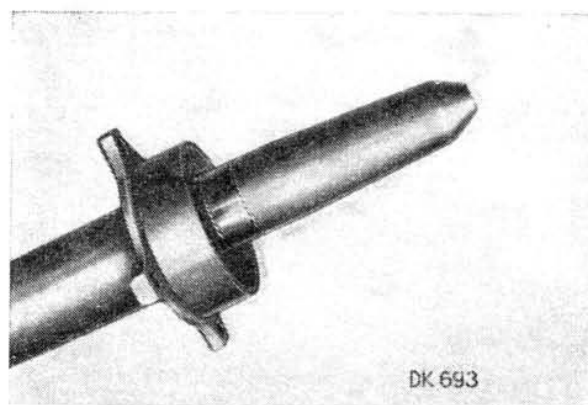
/3 - Installing Half-axle Shaft Using MP 5-114 Jig
